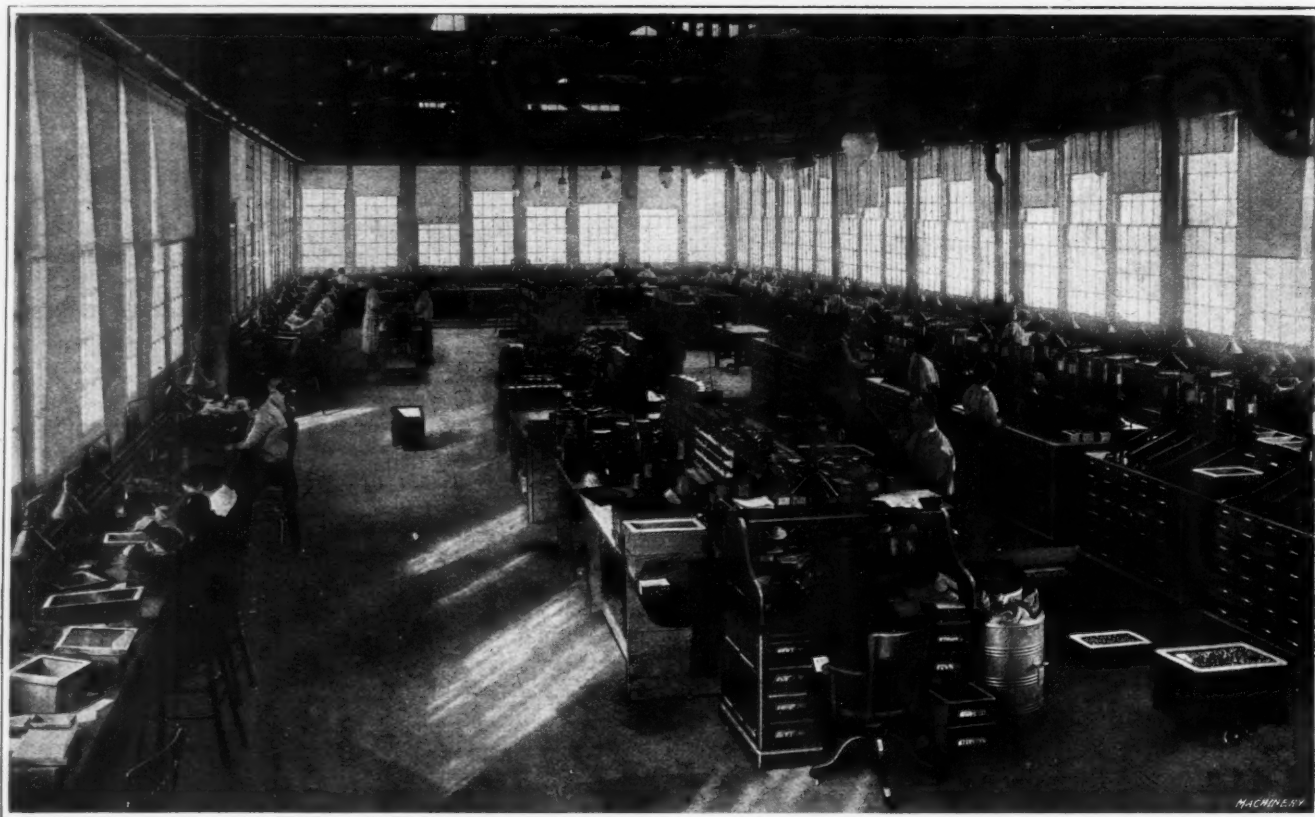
General View of Room in Inspection Department, showing Different Forms of Equipment used for testing, counting and packing Balls
